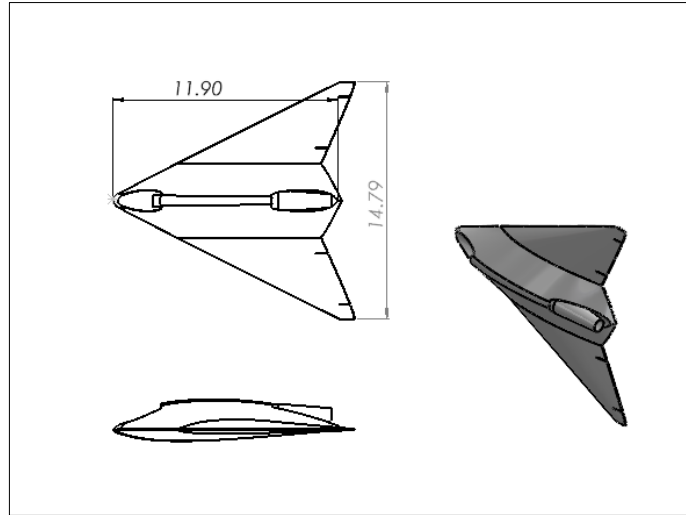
Boeing X-45c Drawing that Clarifies Dimensions.
